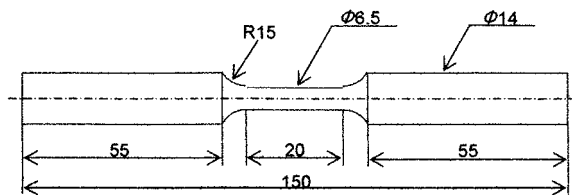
Geometry of fatigue specimen used. (Dimension in mm)
